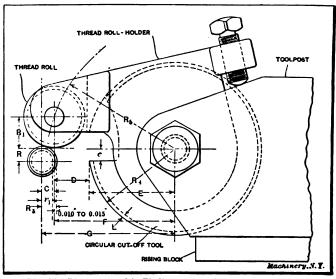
Diagram used in Finding the Total Rise on the Cam for Thread Rolling and Cutting-off
